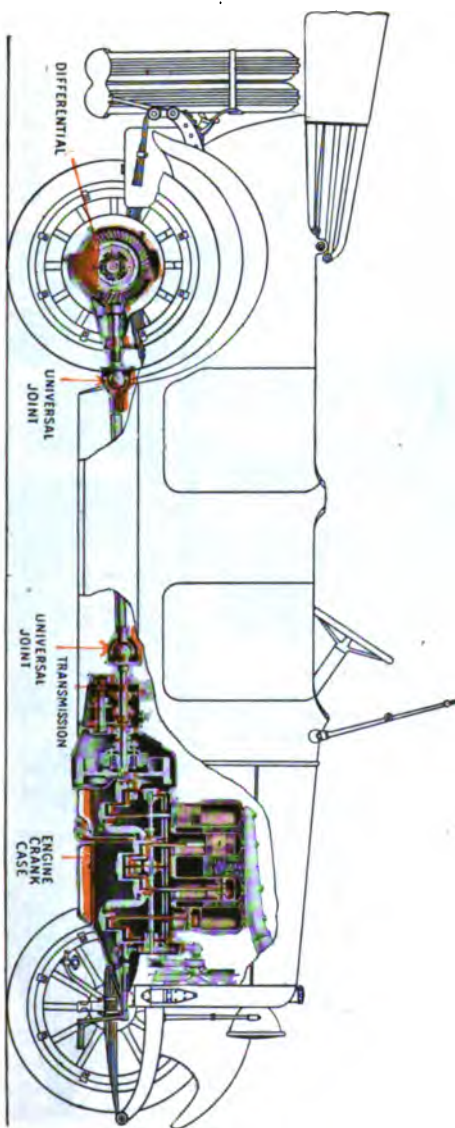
SEC. 104.—Section of passenger car showing points requiring continuous lubrication. (Courtesy, Tidewater Oil Co.)
